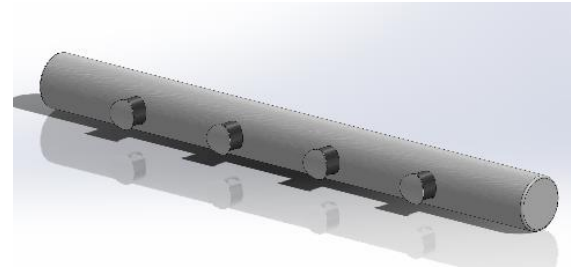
Design 1 CAD Drawing.* Three-dimensional drawing of design solution 1 with retractable nozzles on a PVC pipe.
